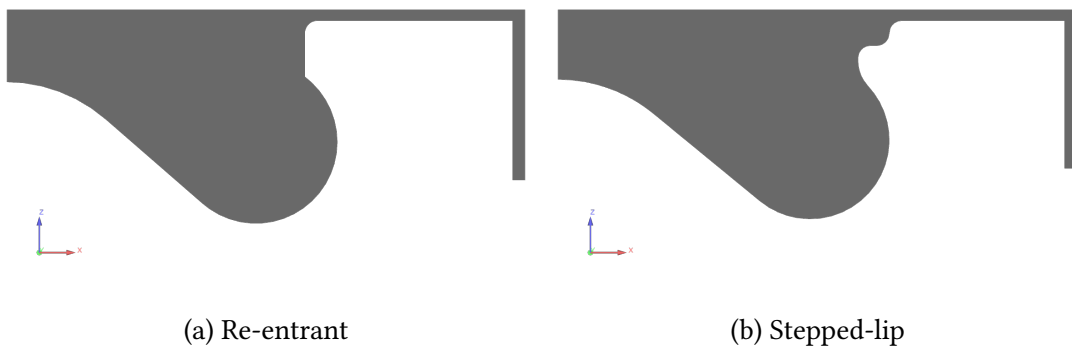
Sectional view of piston bowl geometries highlighting piston-lip.
